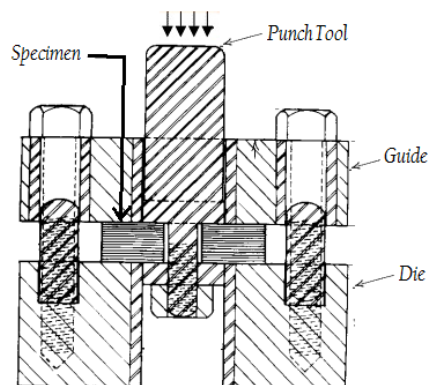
Cross-sectional view of ASTM test rig. Adapted from[7]
